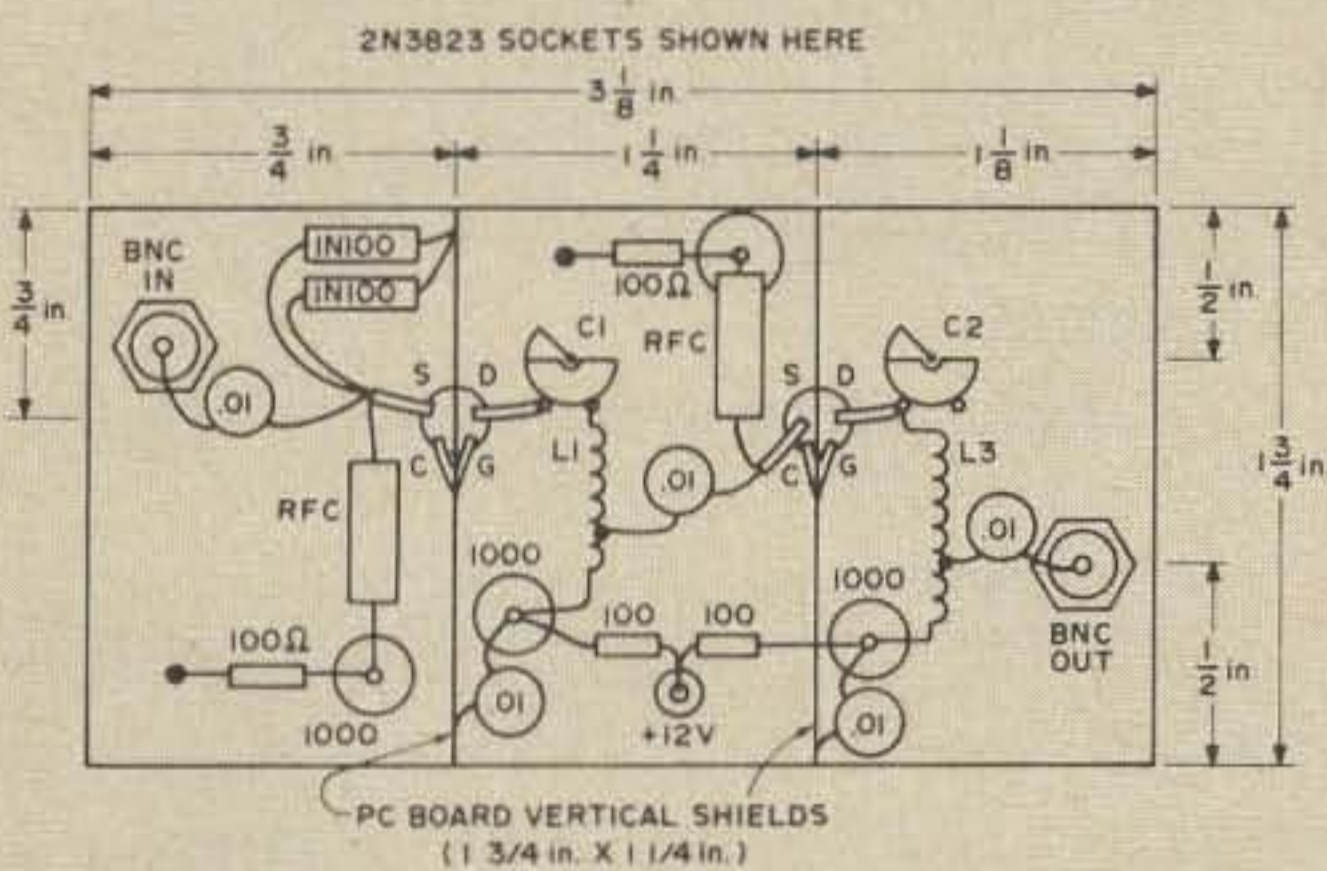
Sketch shows layout of FET preamp. Note use of shield walls between stages.
